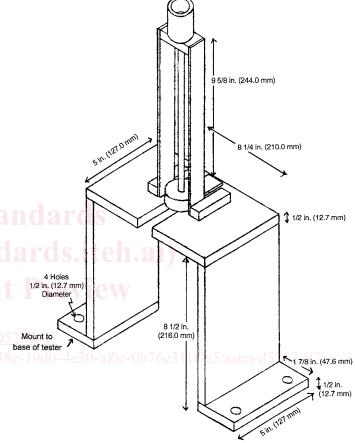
Test Fixture for Measuring Extrusion from Cartridge
